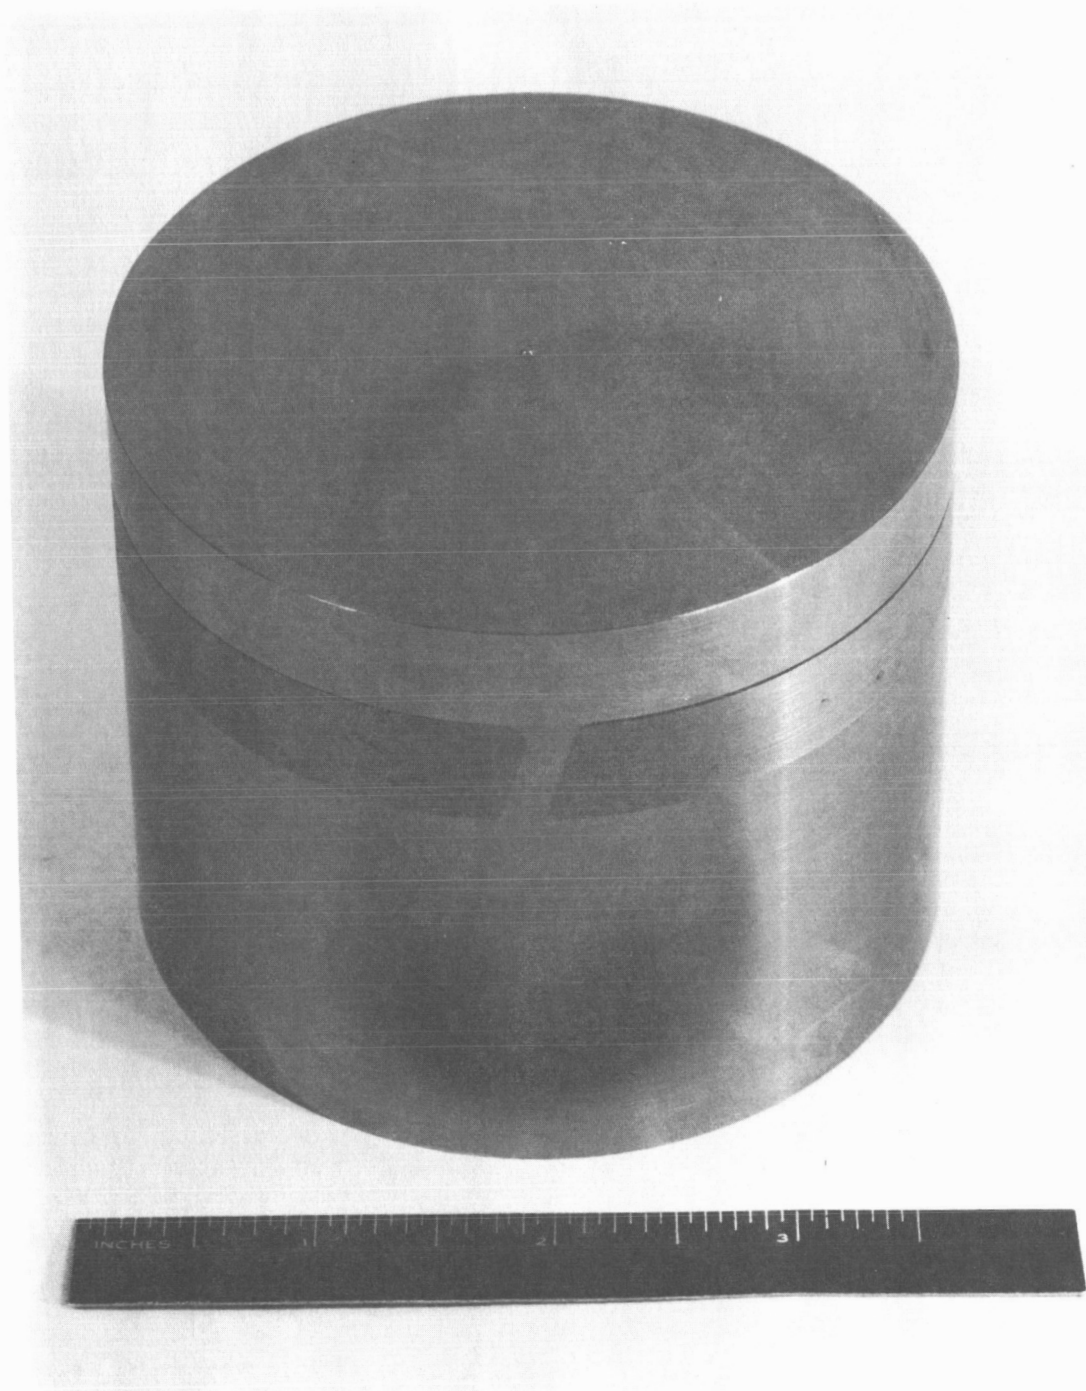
Test Sample After Clean Up Machining - Rear Shroud View
